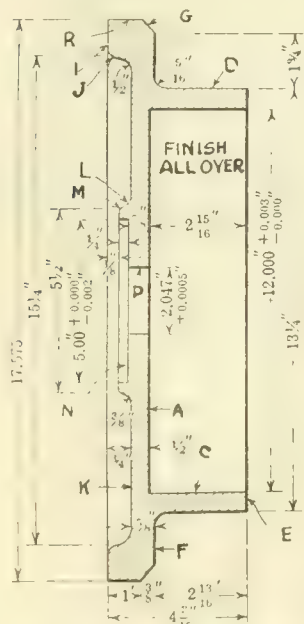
DETAILS OF THE AUTOMOBILE FLYWHEEL.
